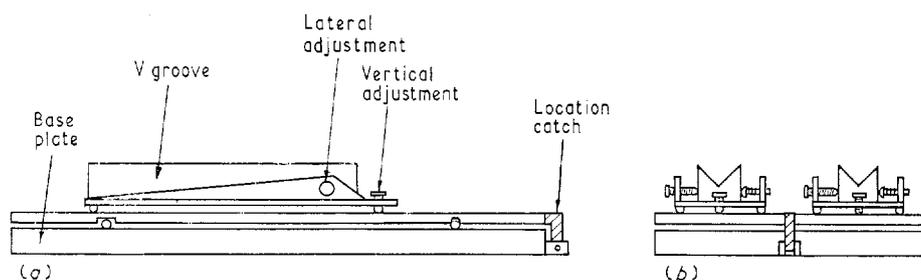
Sample holder. (a) Side elevation showing short sample mount in position; (b) end elevation showing both sample mounts in position
